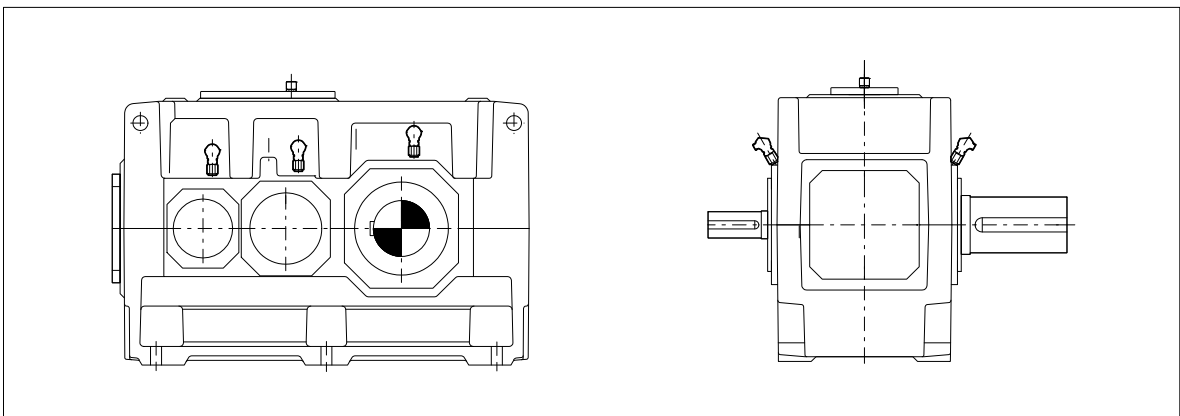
Bearing monitoring by Pt 100 resistance thermometer on gear units type H2.H
